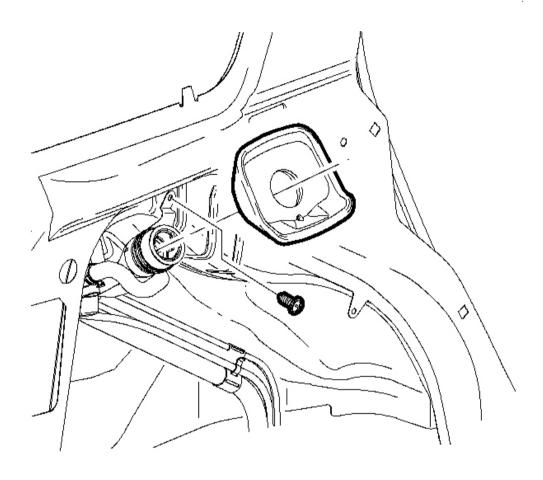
View Of Rubber Grommet Onto The Fuel Filler Pipe Courtesy of GENERAL MOTORS CORP.
